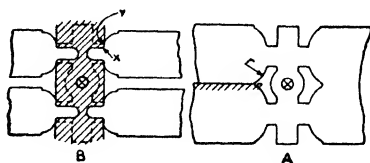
Details from Fig. 315, showing at A the run-out of the slitting cut to avoid slivers and at B the parting cut overlapping the pierced holes to avoid corners or steps.
